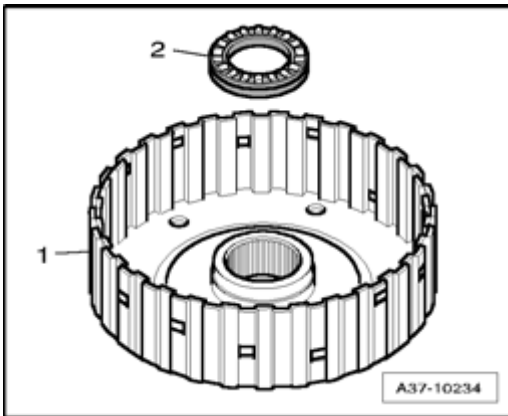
Inner Plate Carrier "B" And Axial Needle Bearing
